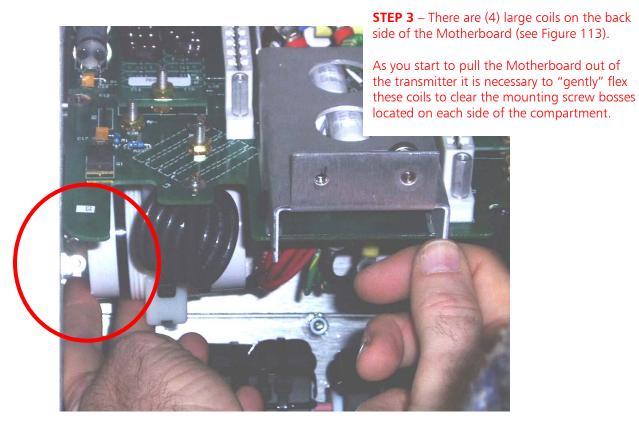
Gently Flex Coils (both sides) to Clear Mounting Screw Bosses
